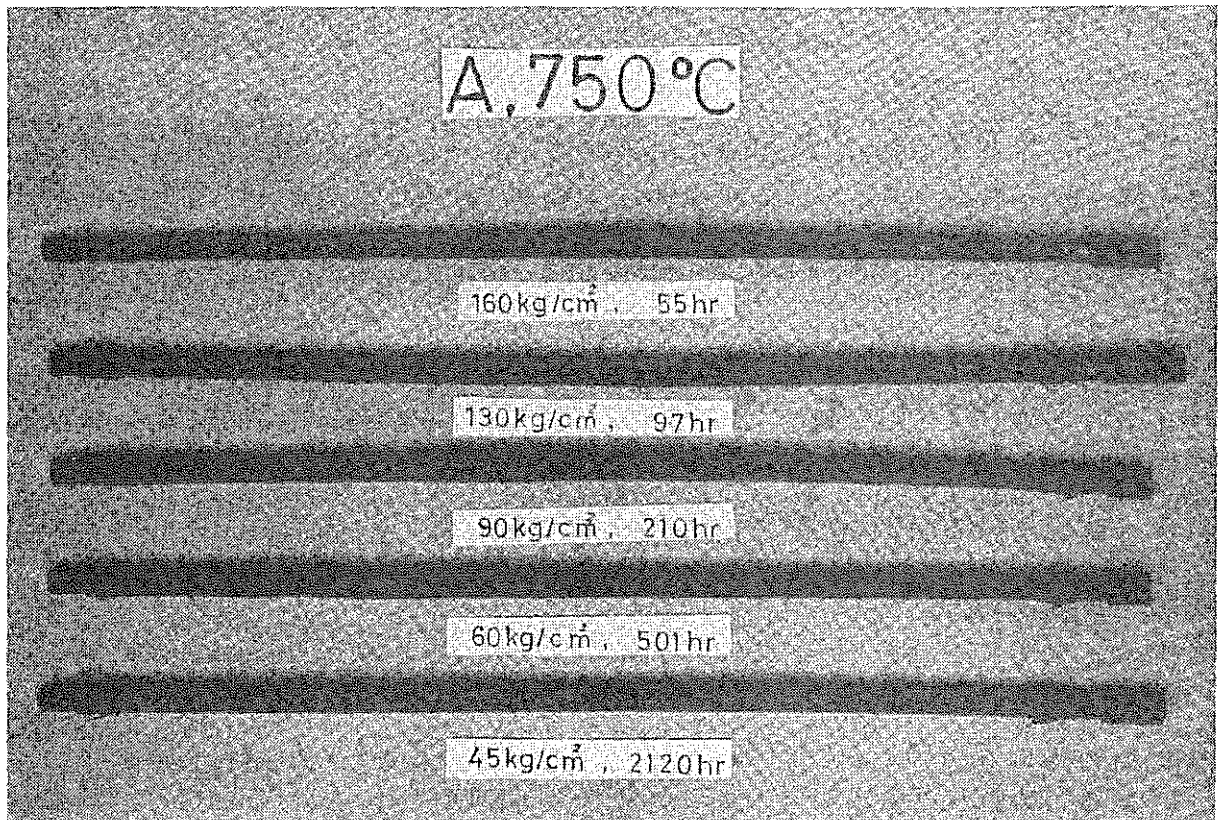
Appearance of Test Pieces after Internal Pressure Creep Rupture Tests (A material)
